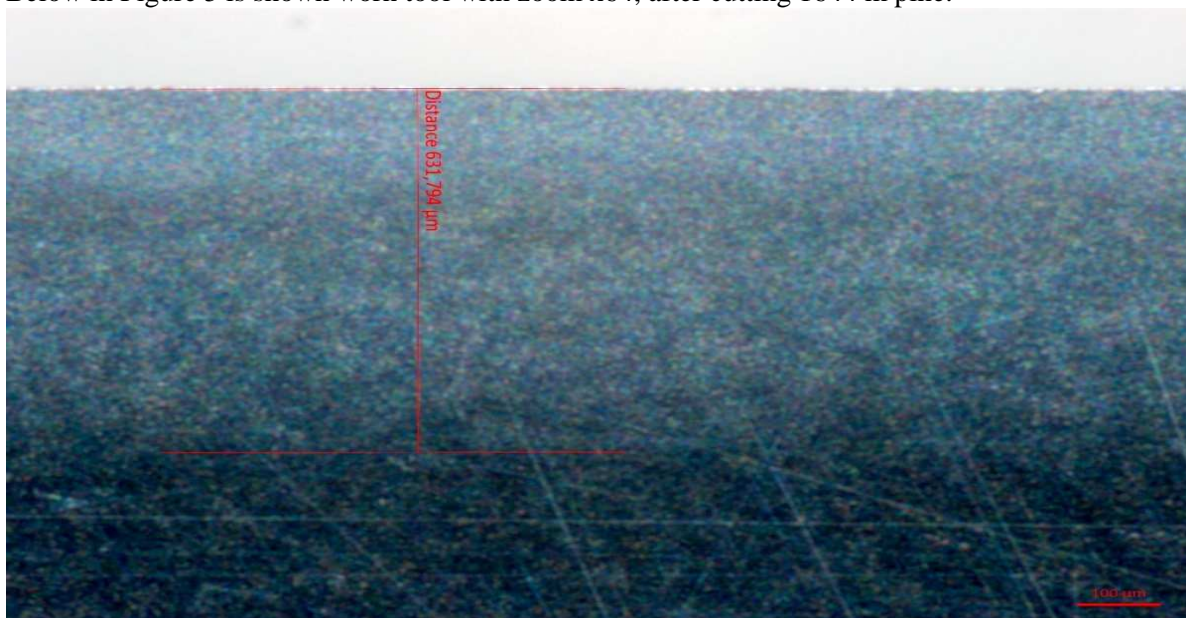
Worn-out planer tool zoom x64, after cutting 1644 m pine
